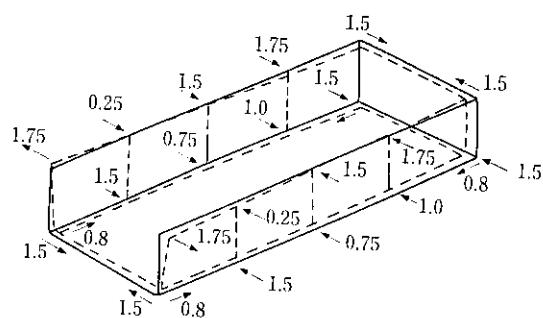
Distortion of model welded trolley structure (mm)
